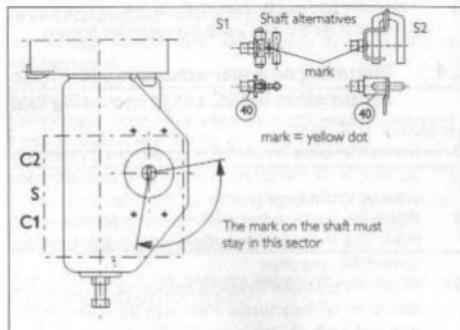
Mounting on Metso Automation actuator with VDI/VDE mounting face
